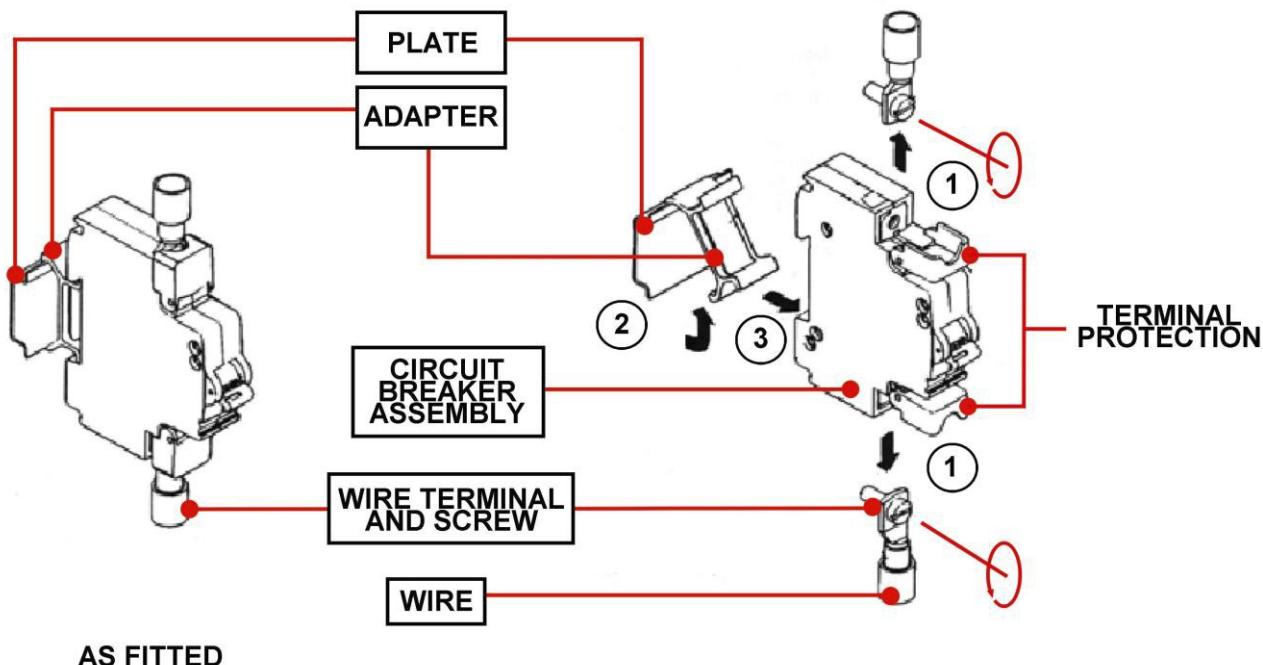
UNIPOLAR CIRCUIT BREAKER TYPE S281 - REMOVAL
